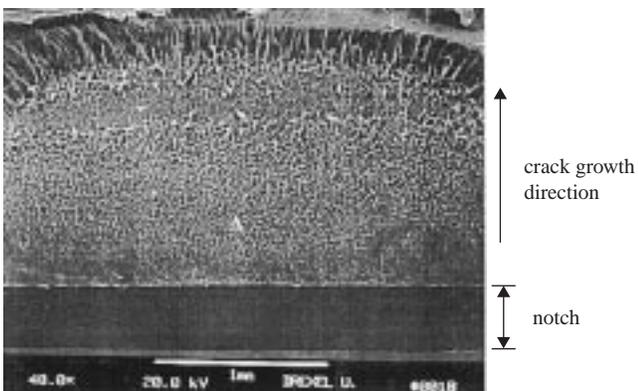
General view of the fracture surface of a specimen at 20% yield stress, illustrating brittle failure.
